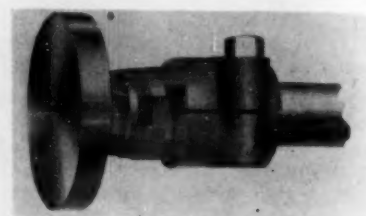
Flat Plate Attached to the Tailstock Spindle
